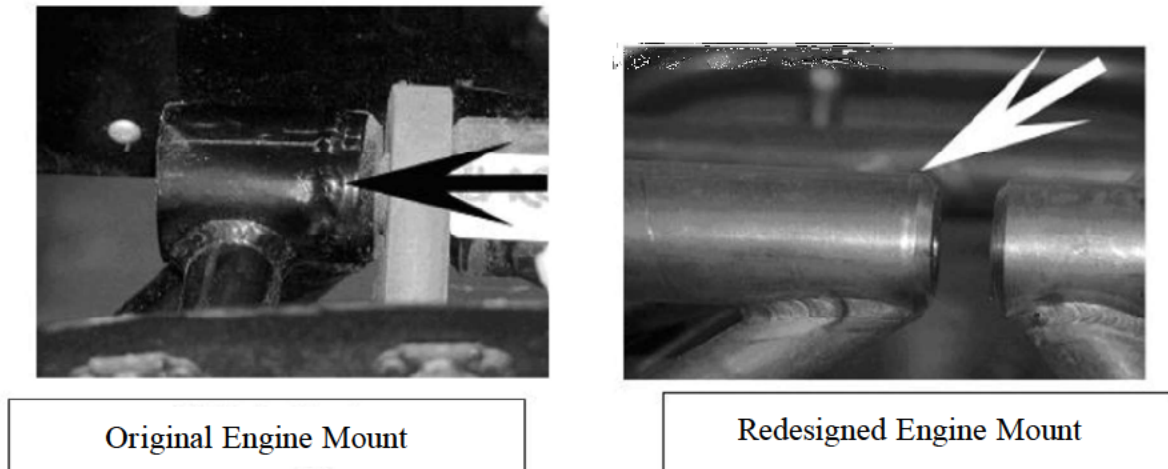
Piper PA-46-350P crack locations on engine mount
